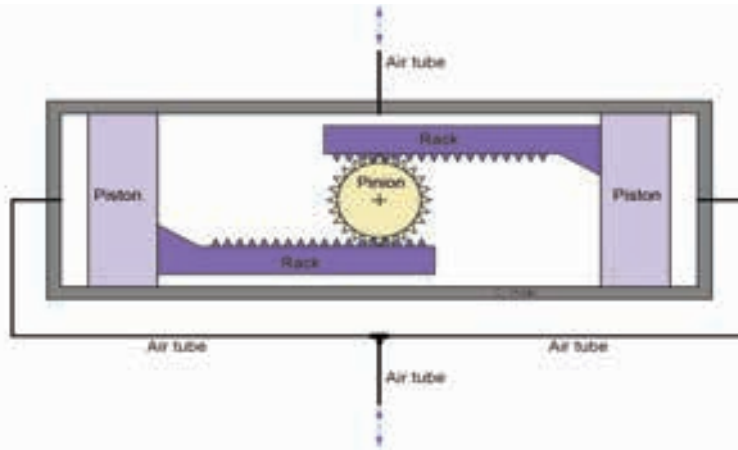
FIGURE- SIMPLE CONSTRUCTION OF A RACK & PINION ACTUATOR
